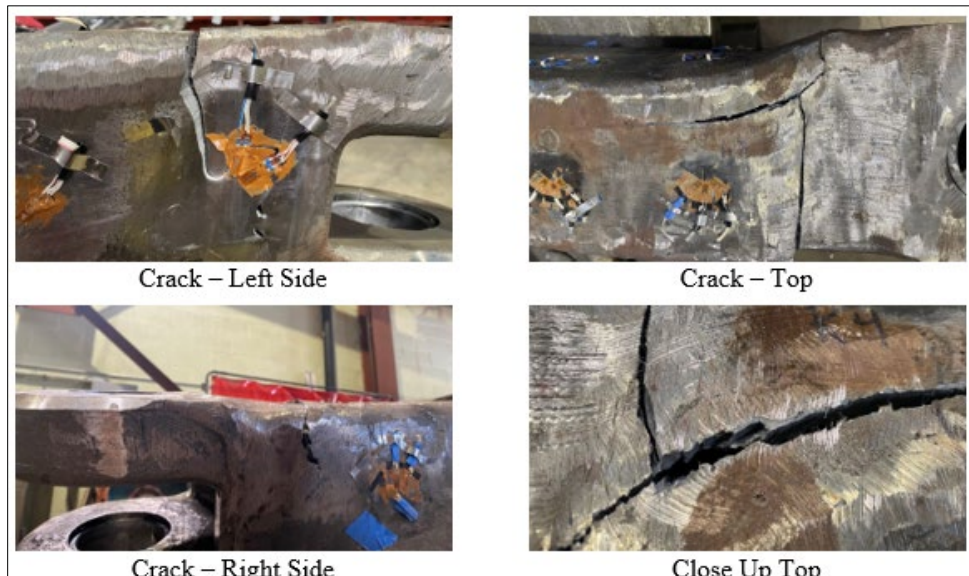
Crack Locations – Coupler Failure Test Specimen 2
